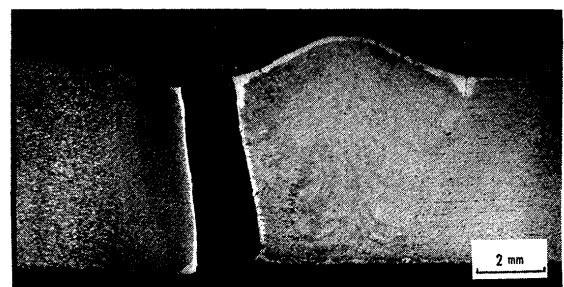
Recrystallized macrostructure around fatigue fracture in electron beam weld of HT50
